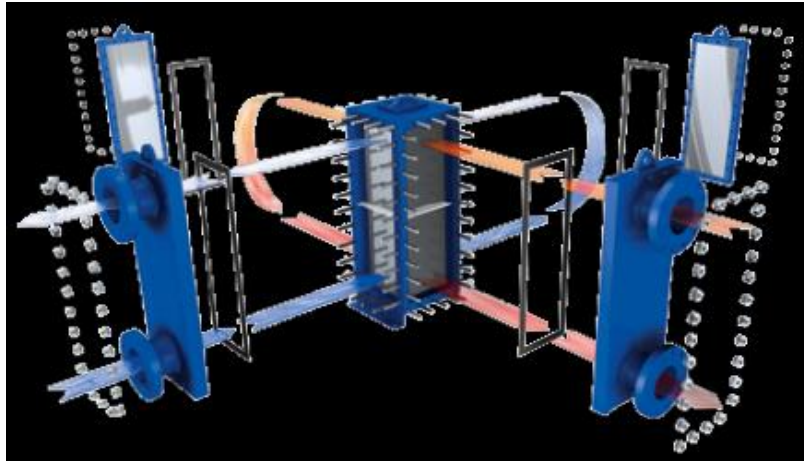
GEA welded plate heat exchanger exploded view (GEA, 2012)
